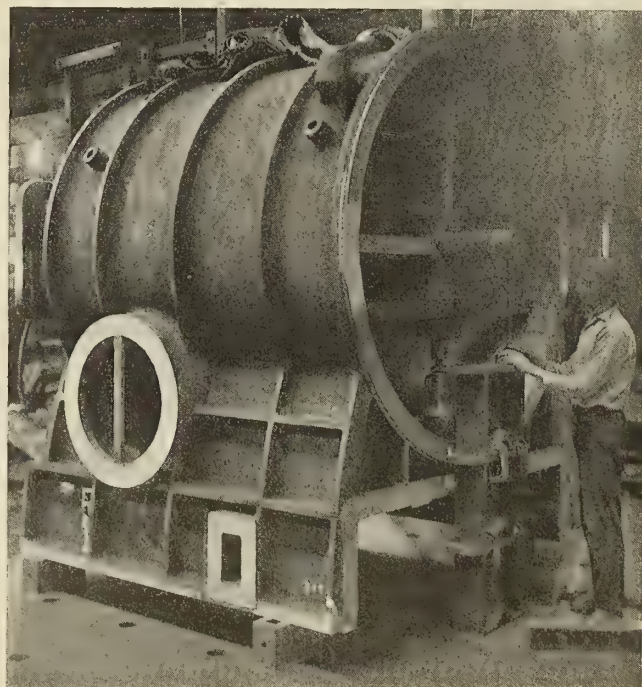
Carefully Checking All Machine Work and Laying Out for Drilling and Assembling
